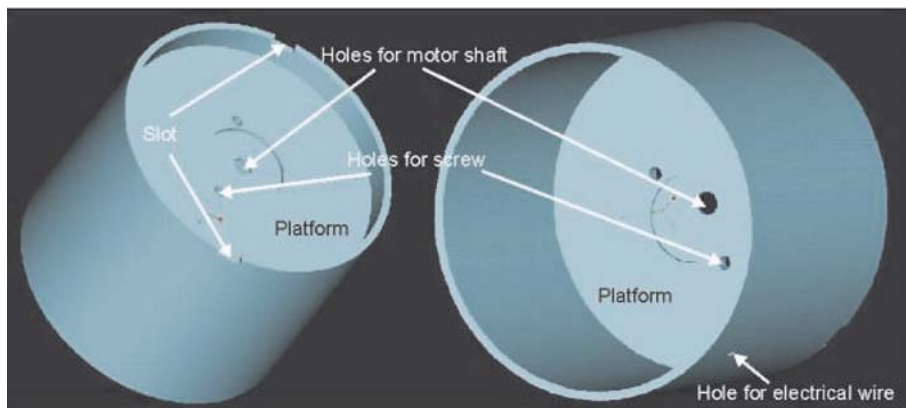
Illustration of Pro-E version of motor box. Left is topside view of the motor box and right is bottom-side view of the motor box.
